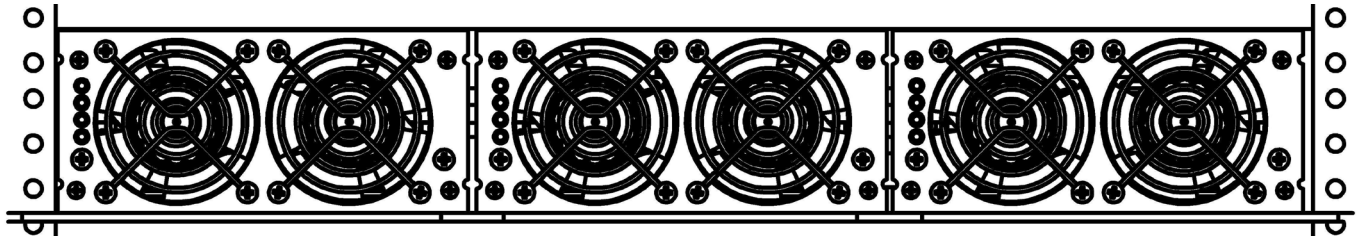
Mounting KAN5000 units on the mounting shelf
